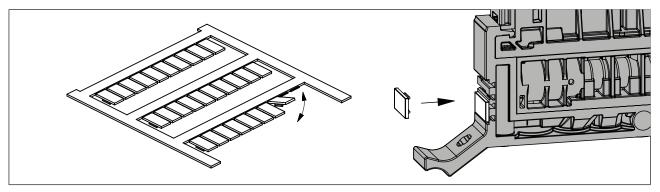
Labelling of the valve positions with device markers in MultiCard format: After printing, the device markers can be removed from the sprue and clipped onto the valve.
